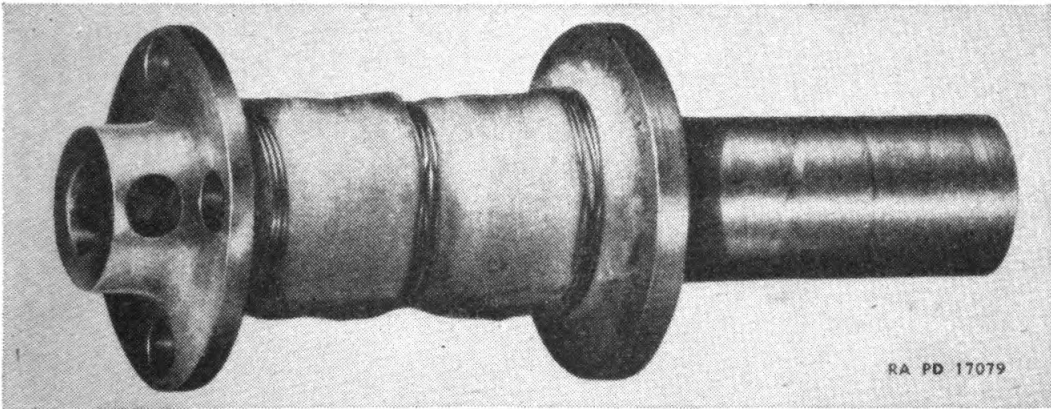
Filter bobbin assembly for oil gear filter.
